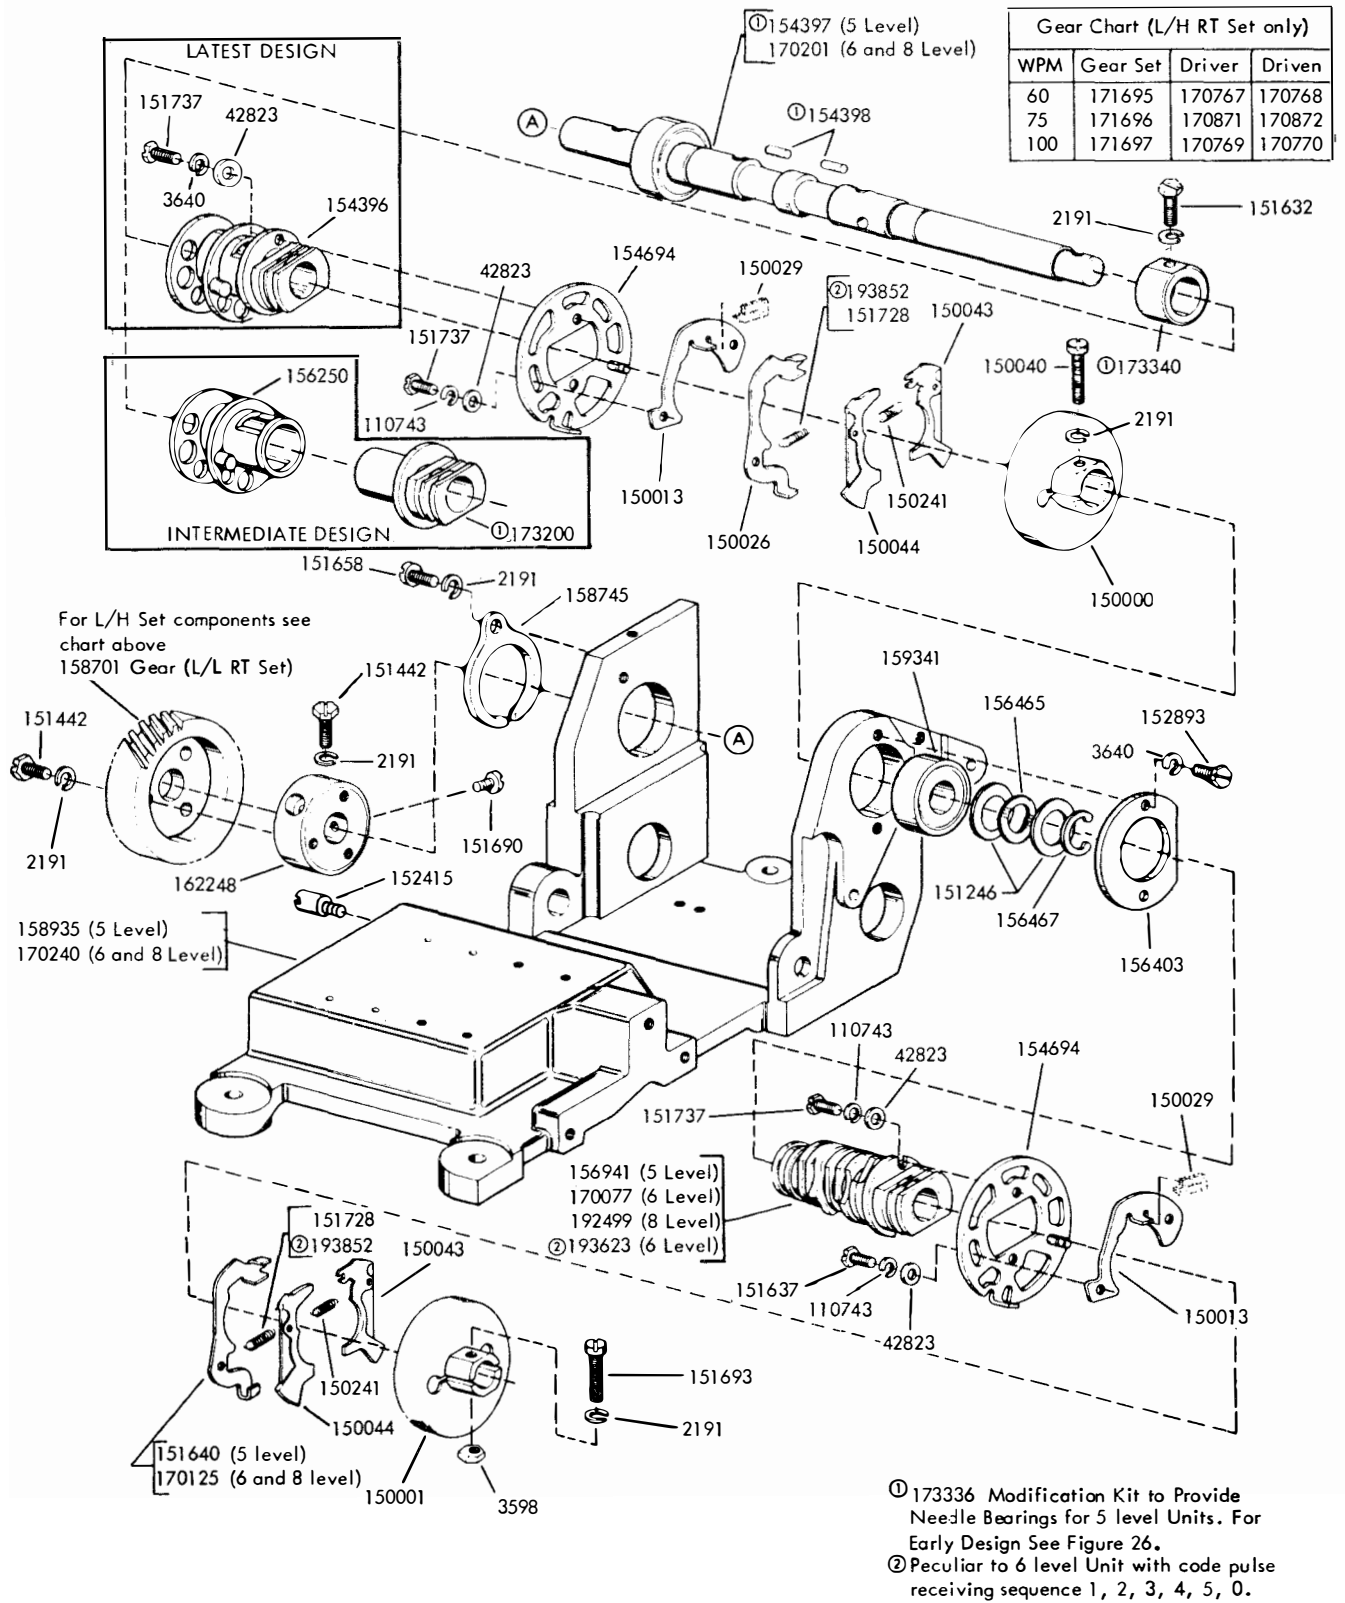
SINGLE CYCLE SELECTOR CLUTCH MECHANISM
